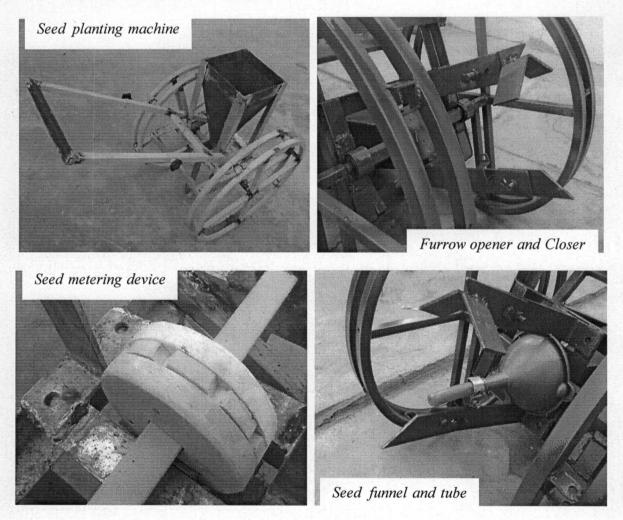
Photograph of component parts of the fabricated seed planter
